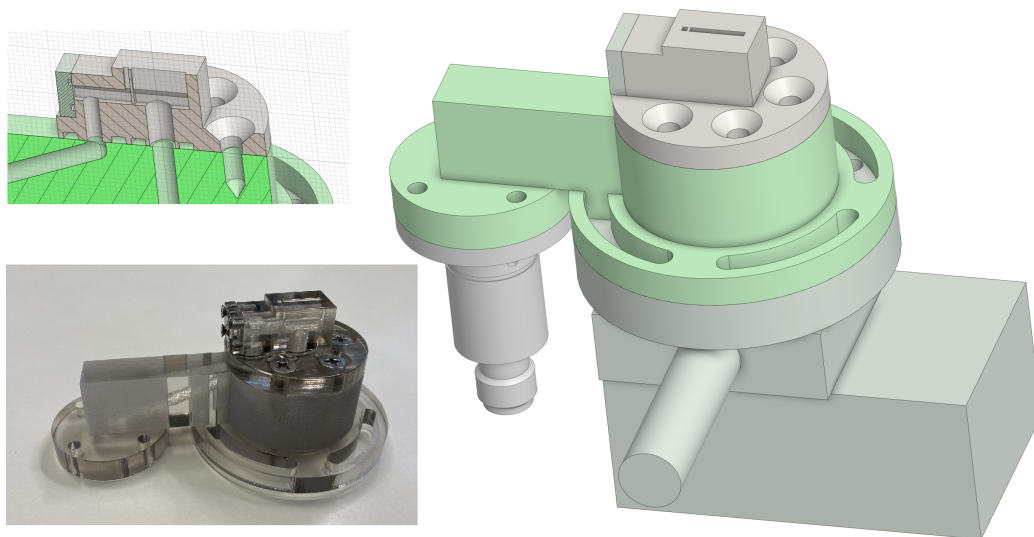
Design of the slit nozzle with injector section (right) with SmartShell and Parker valves, its top part cross-section (top left), and photography of the device printed on precision resin 3D printer (bottom left).
